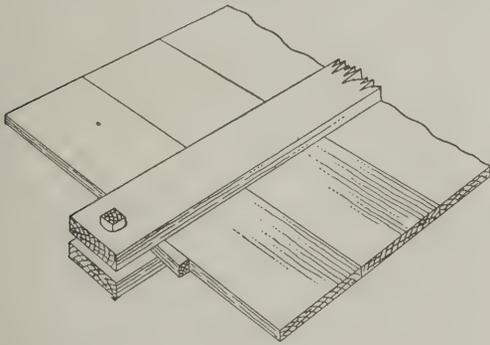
The Clamp in Use, Showing Wedge for Tightly Holding the Material Together
